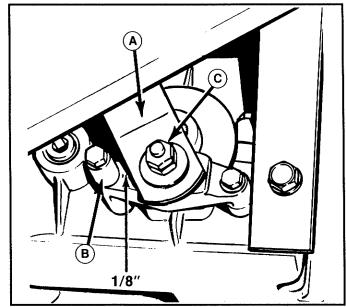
Parking Brake Adjustment - Gear Model (Viewed from right side of transmission)
